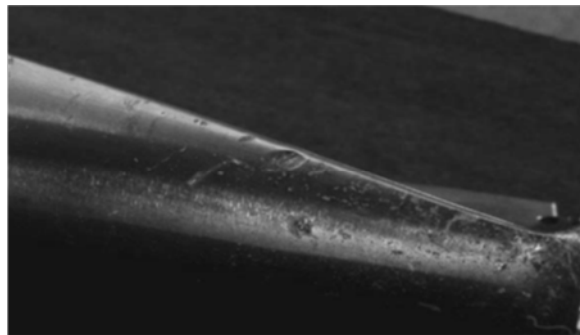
Mechanical damage caused by ingested foreign material on the leading edge of a compressor blade [10].
